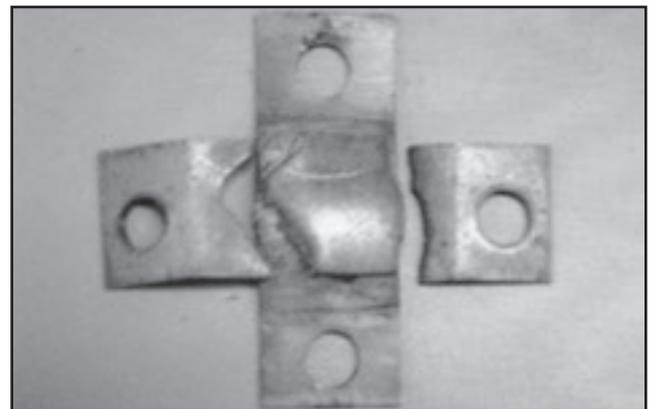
Appearance of the joint broken at the base metal after tensile test.
